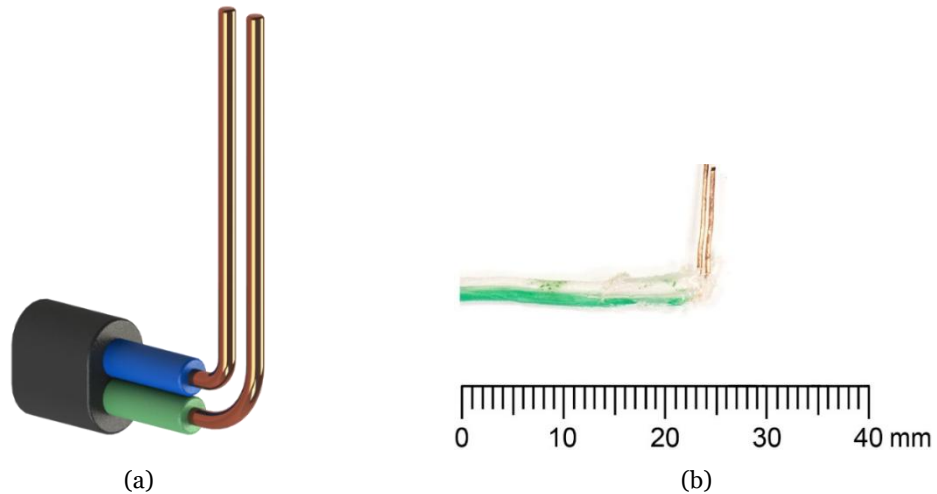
Rendered view of the CAD model (a) and picture (b) of the AGRS3.
